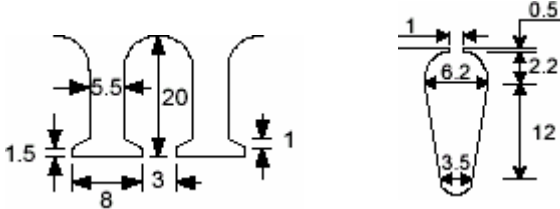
Stator teeth and rotor bar dimensions, in mm.
